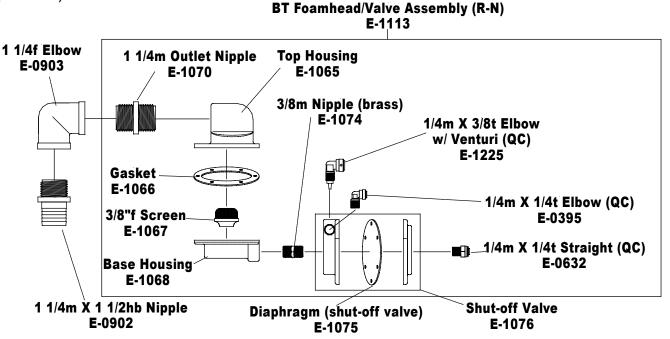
BOOM TRACKER Foamhead / Valve Assembly
